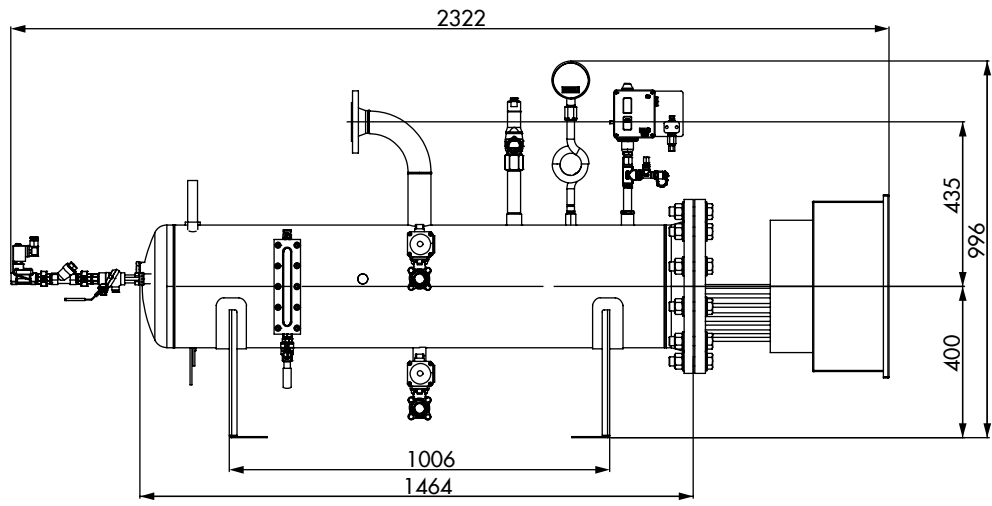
Type 7120 Electric Steam Generator · Dimensions
